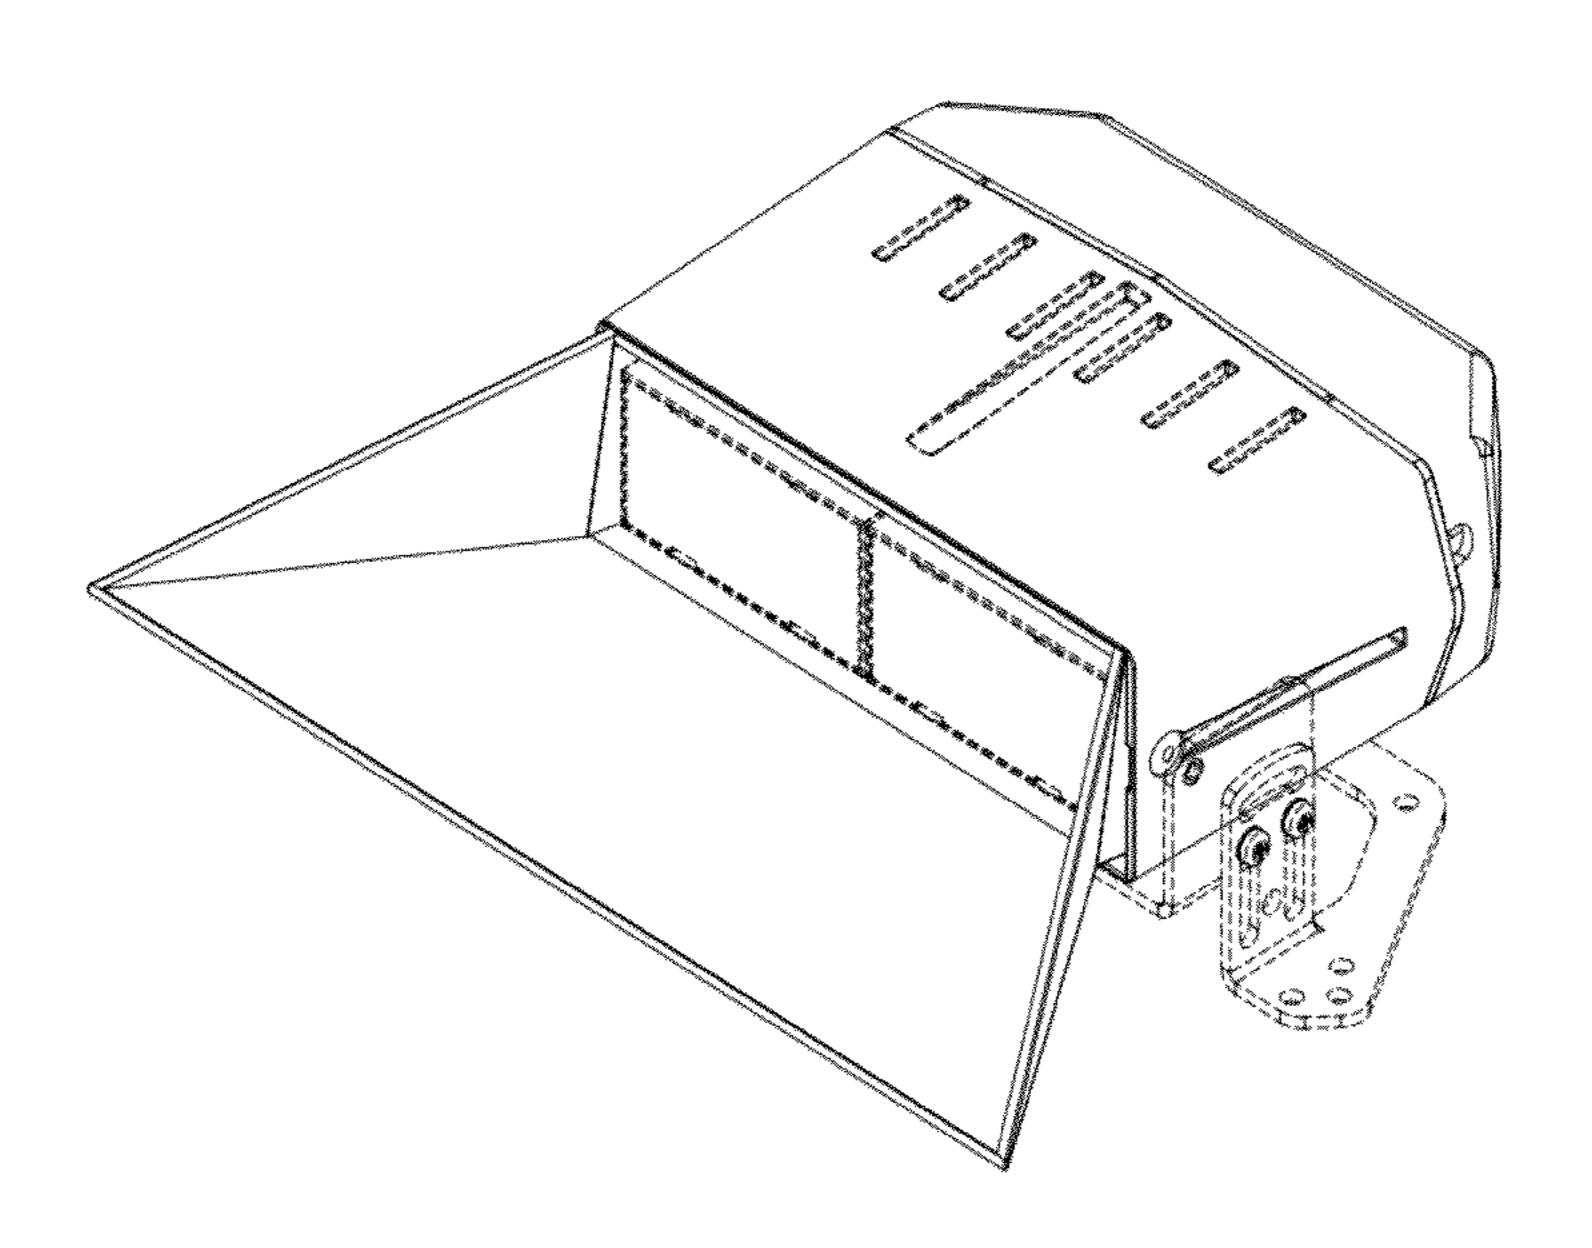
is a bottom view of the interior light assembly with flared visor;
